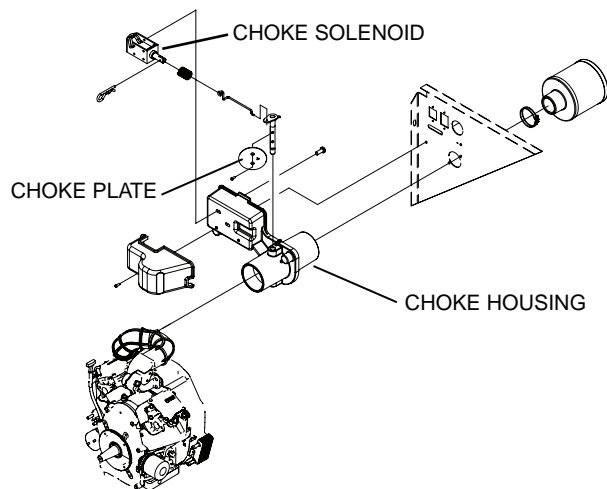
Exploded View Showing Location of Choke Plate - 10kW Units
